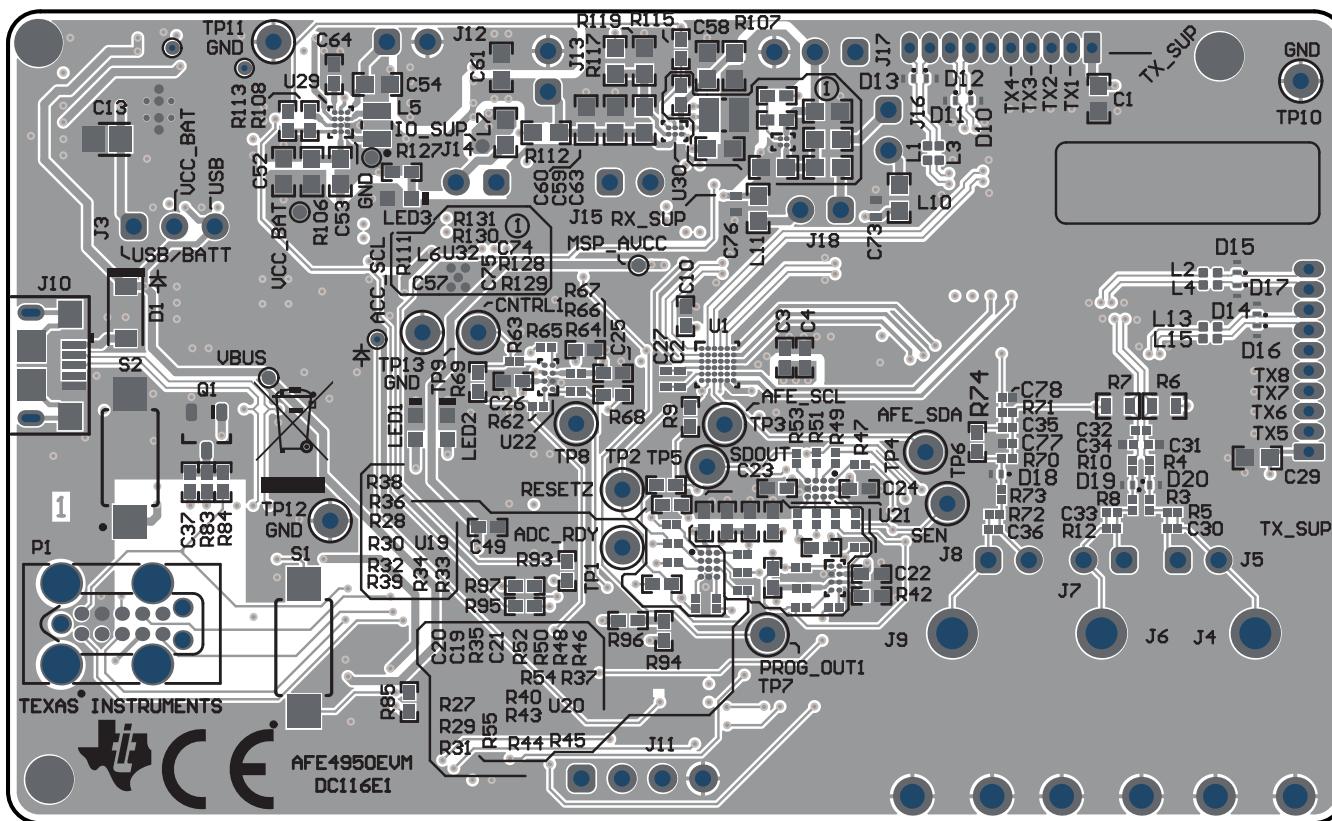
AFE4950EVM PCB Layout - Top Layer with components(6 of 6)
